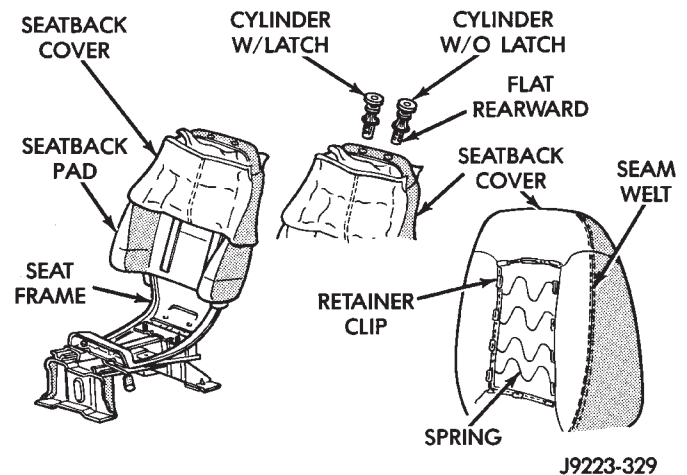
Straightening Seam Welts and Lining—Standard Seat
